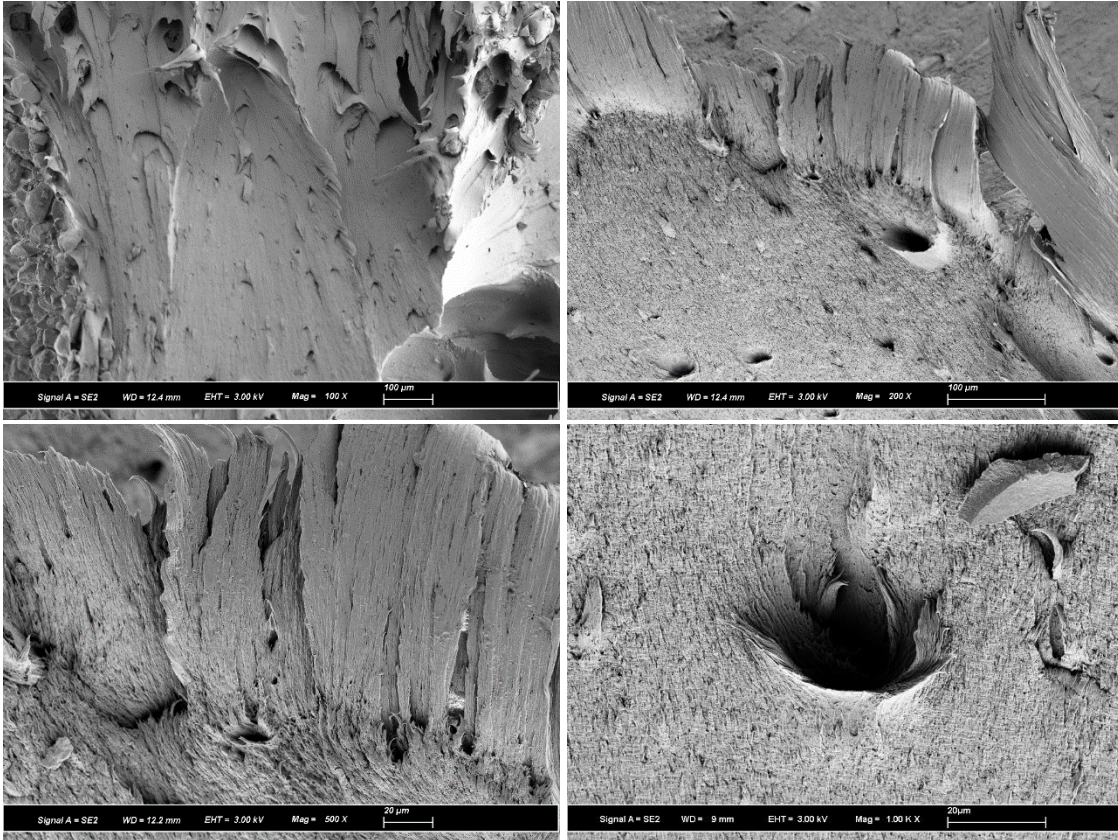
Selected tensile fracture surface images of AN8 printed samples.
